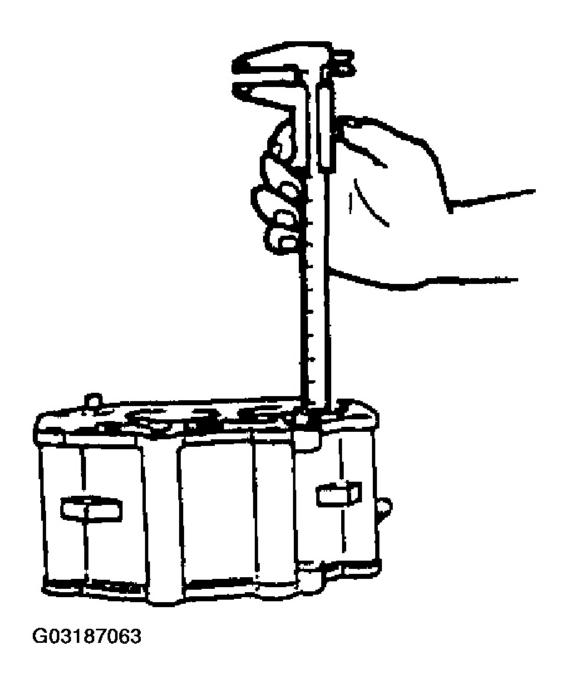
Measuring Intermediate Housing Pin Height Courtesy of MAZDA MOTORS CORP.
